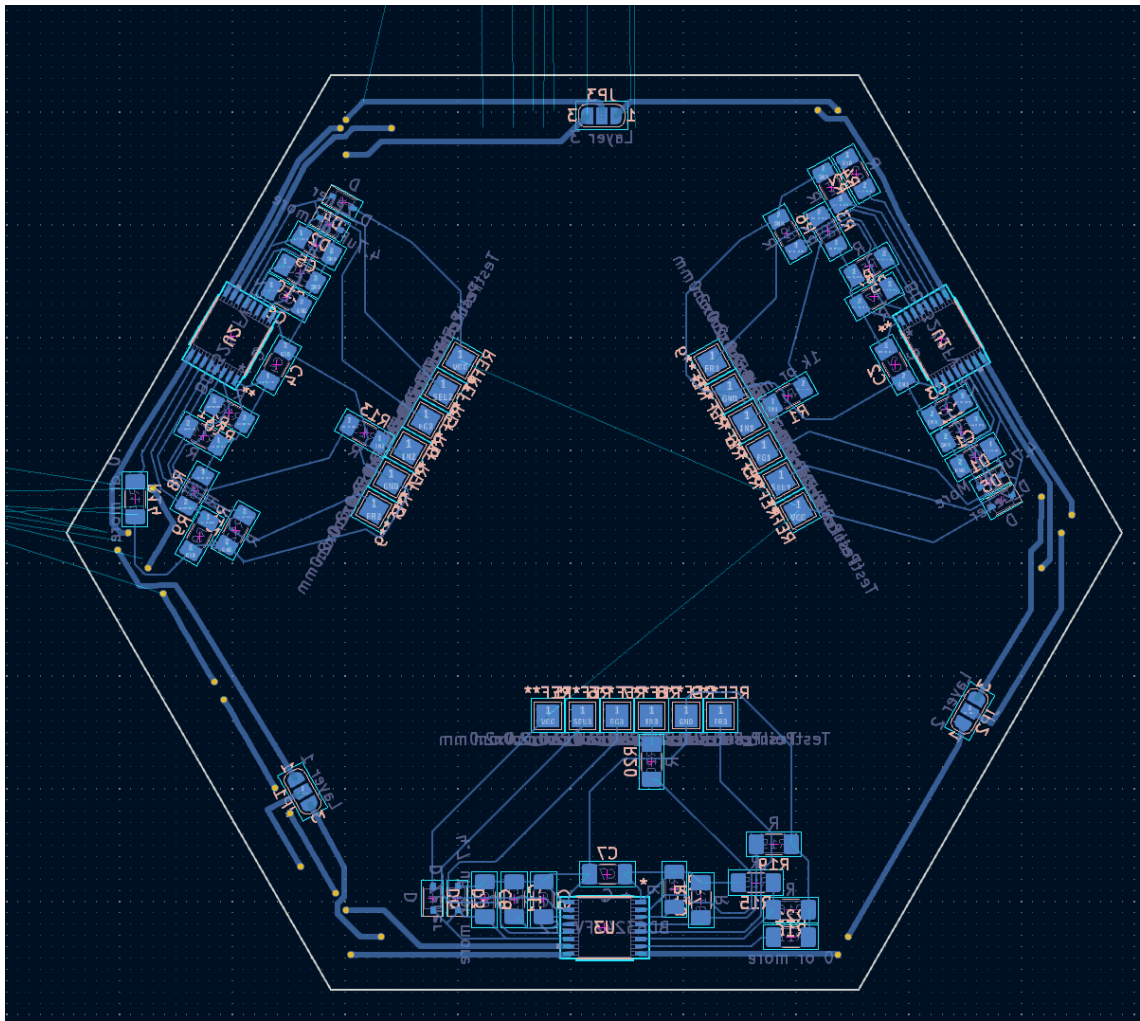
Detailed View of the Finished Layout's Back Plane
